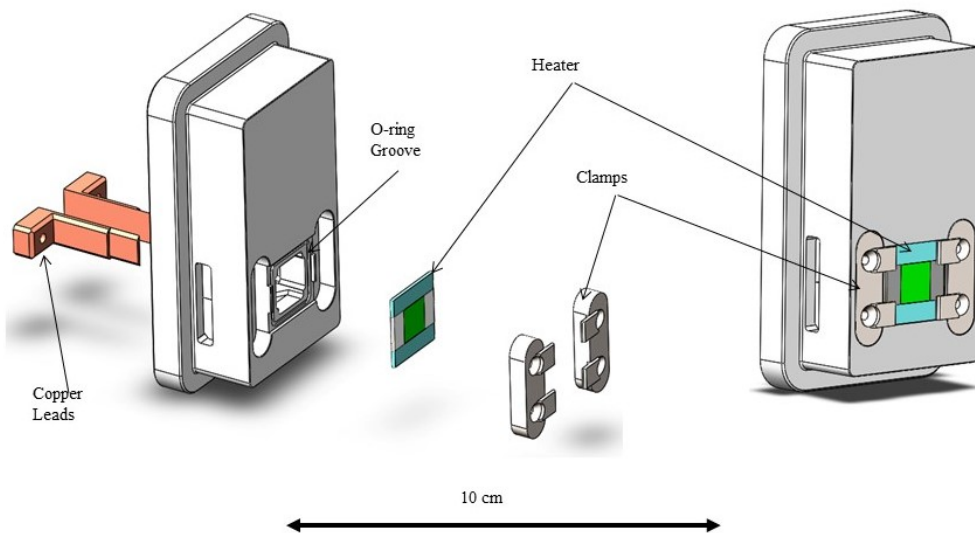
Exploded view of cartridge assembly (Left). View of assembled cartridge with ITO heater (Right).
